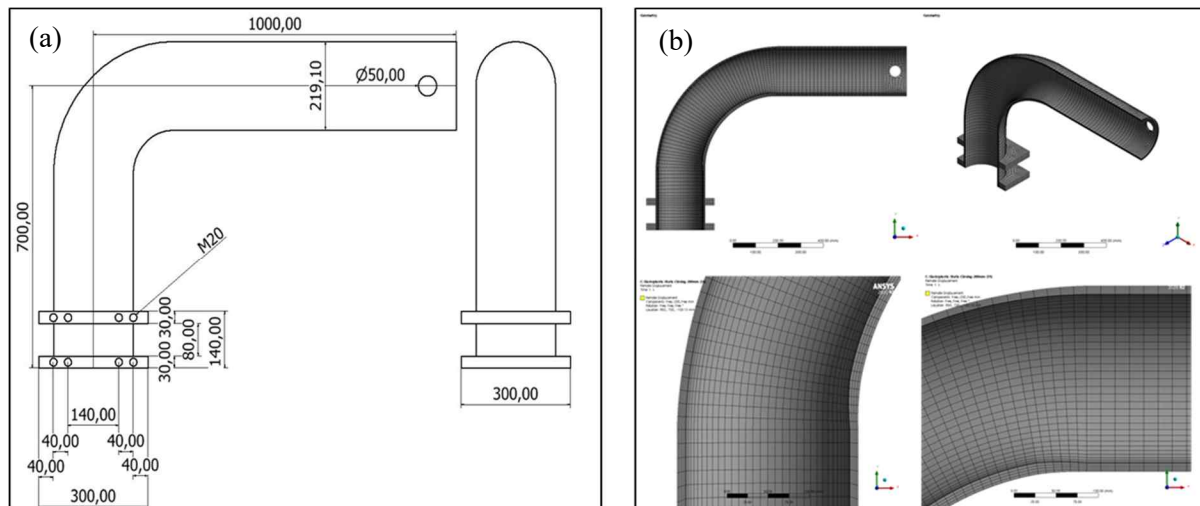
(a) Drawing of the bent pipe test structure (b) finite element model of the bent pipe.
